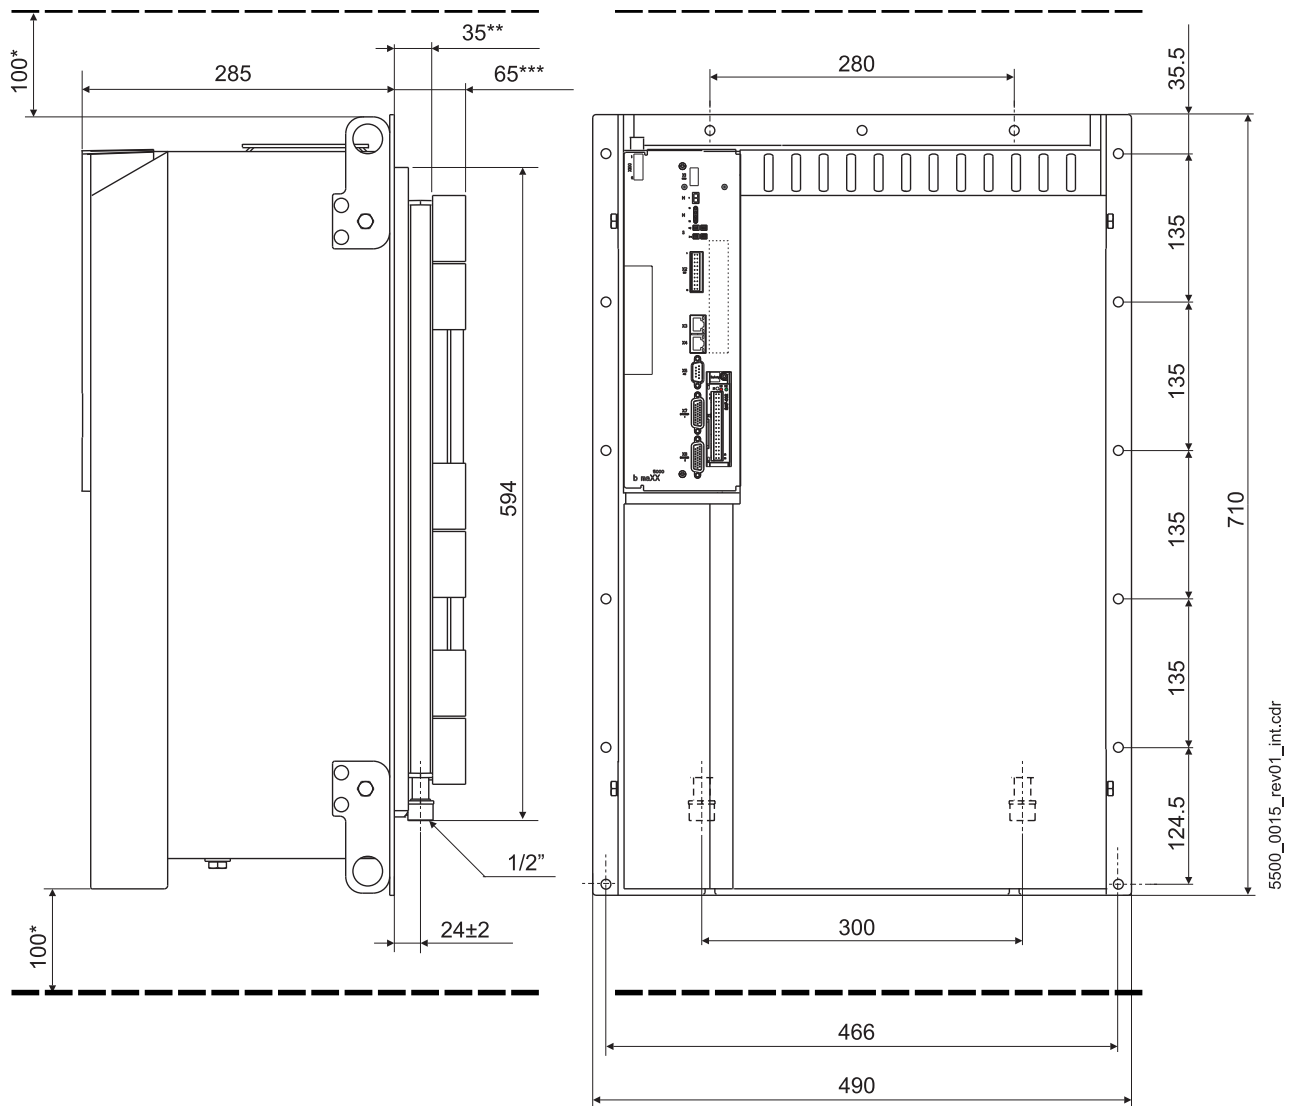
Dimensions BM566X-FXX9, BM576X-FXX9
